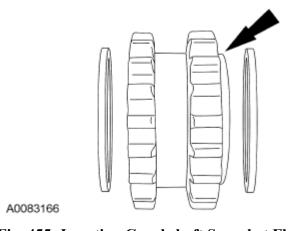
Locating Crankshaft Sprocket Flange Courtesy of FORD MOTOR CO.
